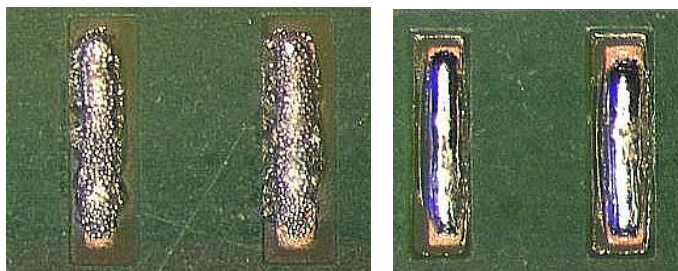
Lead-free solder pastes often do not coalesce well. This figure shows the difference between good and bad coalescing paste. Figure courtesy of Motorola.
